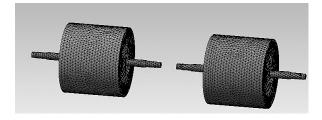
Dynamometer rollers and shift assembly from structure prototype
